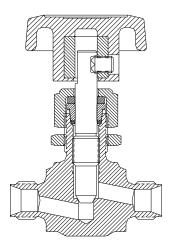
Cross Sectional View of Needle Valve with Tapered Packing
